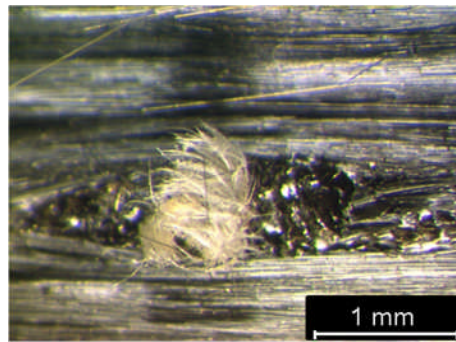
Ruptured aramid tuft at fracture surface of highly bindered specimen for tufting depth of 4 mm.
